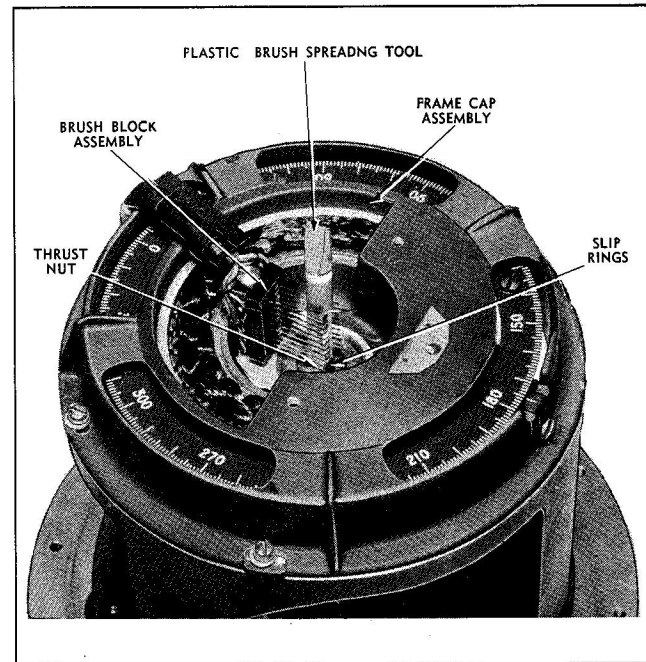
Plastic Brush-spreading Tool Placed for Removal of Brush Holder Assembly
